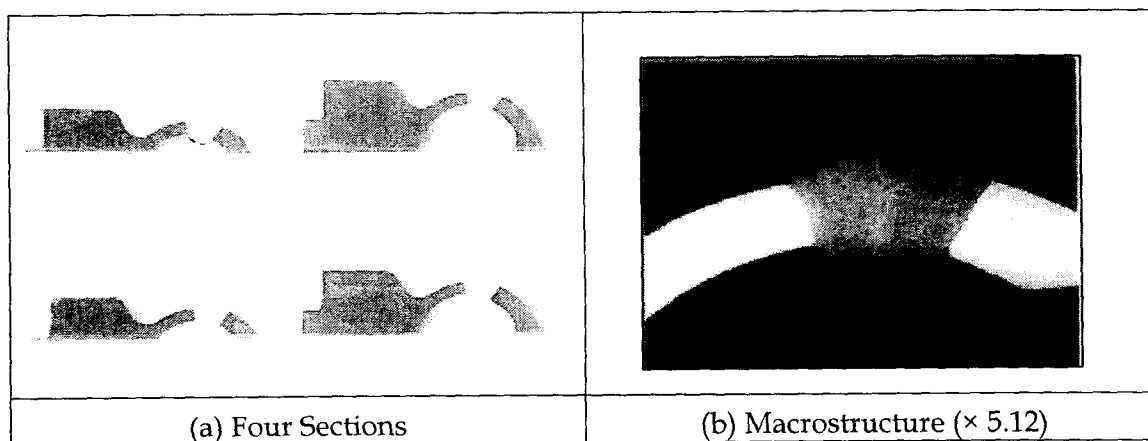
The Macrostructure of Upper Omega Seal Welding Joint
